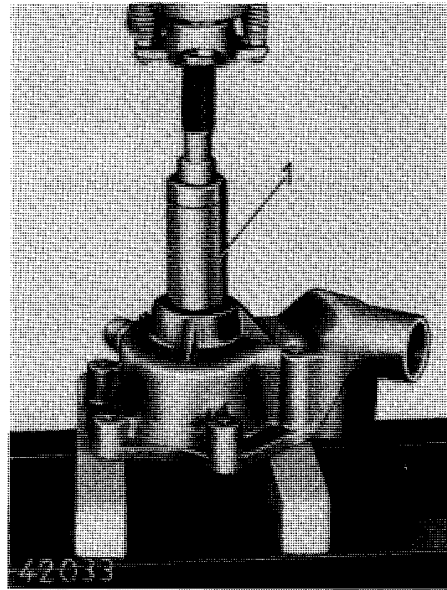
Driving Out Ball Bearing With Pump Shaft, Seal Ring and Impeller, Using Special Tool No. JD 262
